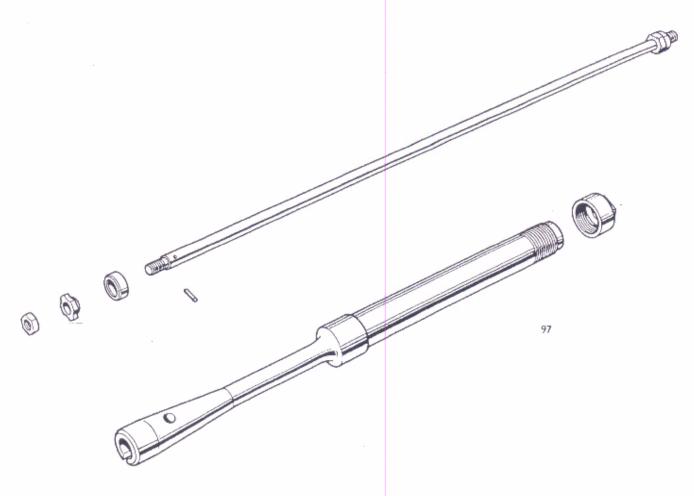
Exploded view of telescopic fork internal hydraulic damper unit assembly
